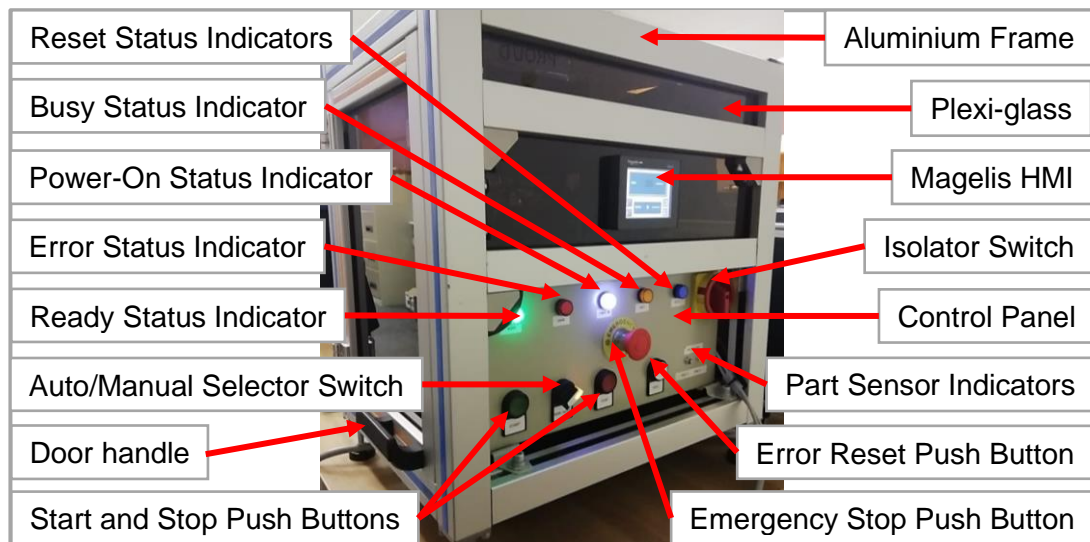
Bobbin FSW Feeder Process Control Unit
